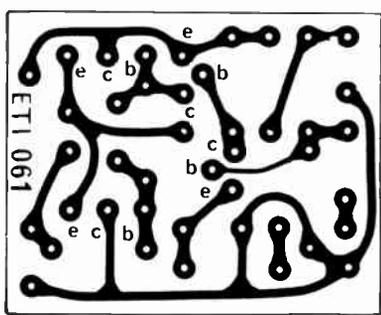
Printed-circuit board layout (copper side). Full size of this board is 40mm x 50mm.
